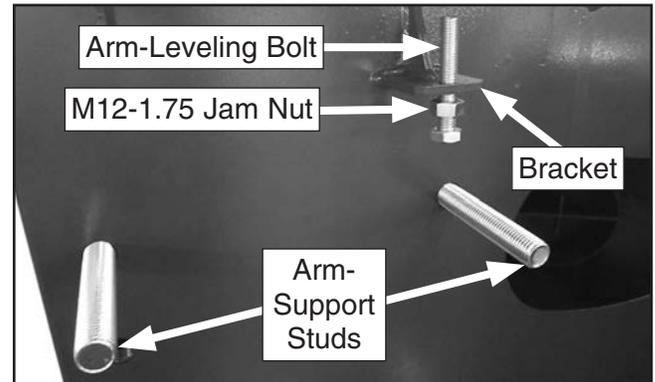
Arm-support studs installed in body and arm-leveling bolt installed in bracket.
